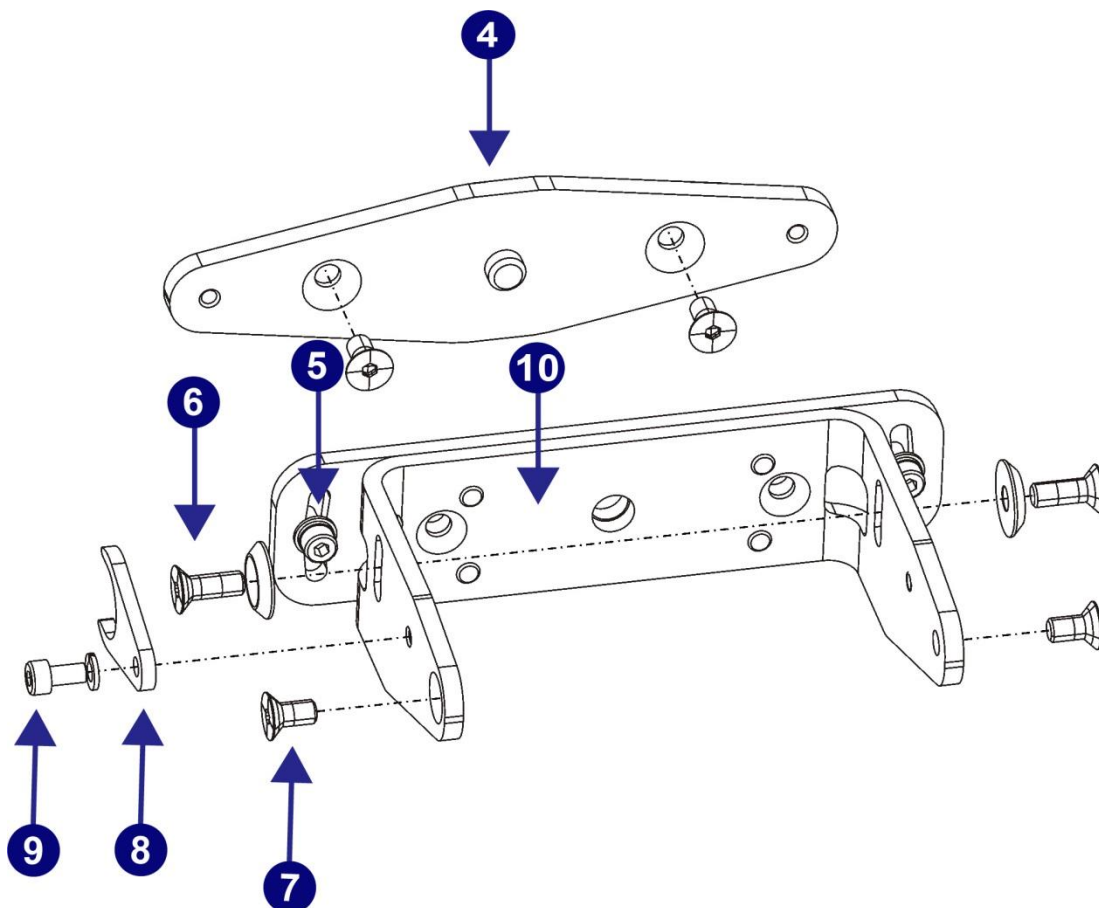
Pitch and Roll Angle Adjustment Bracket
